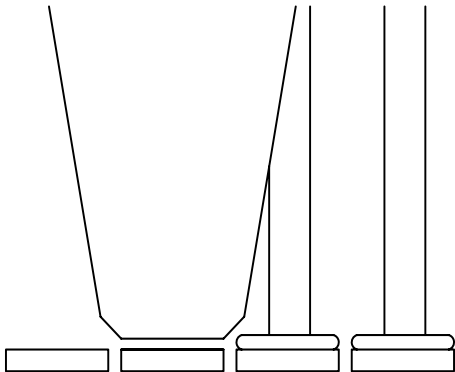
Drawing showing the advantage of a 45° side chamfer
